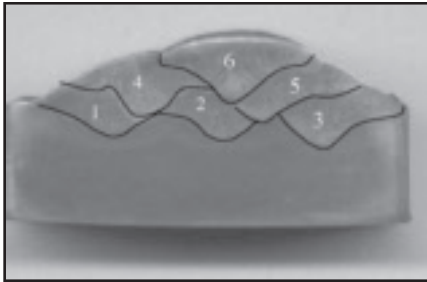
Macrophotograph of weld B5 showing the three layers and six weld beads.
